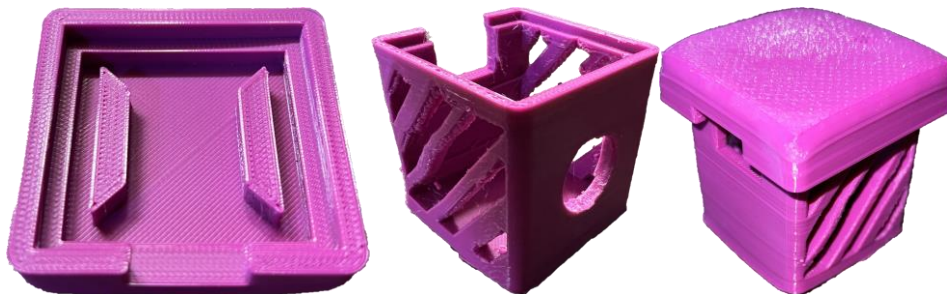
Prototype 1 Printing of the Solar Encasing Assembly
